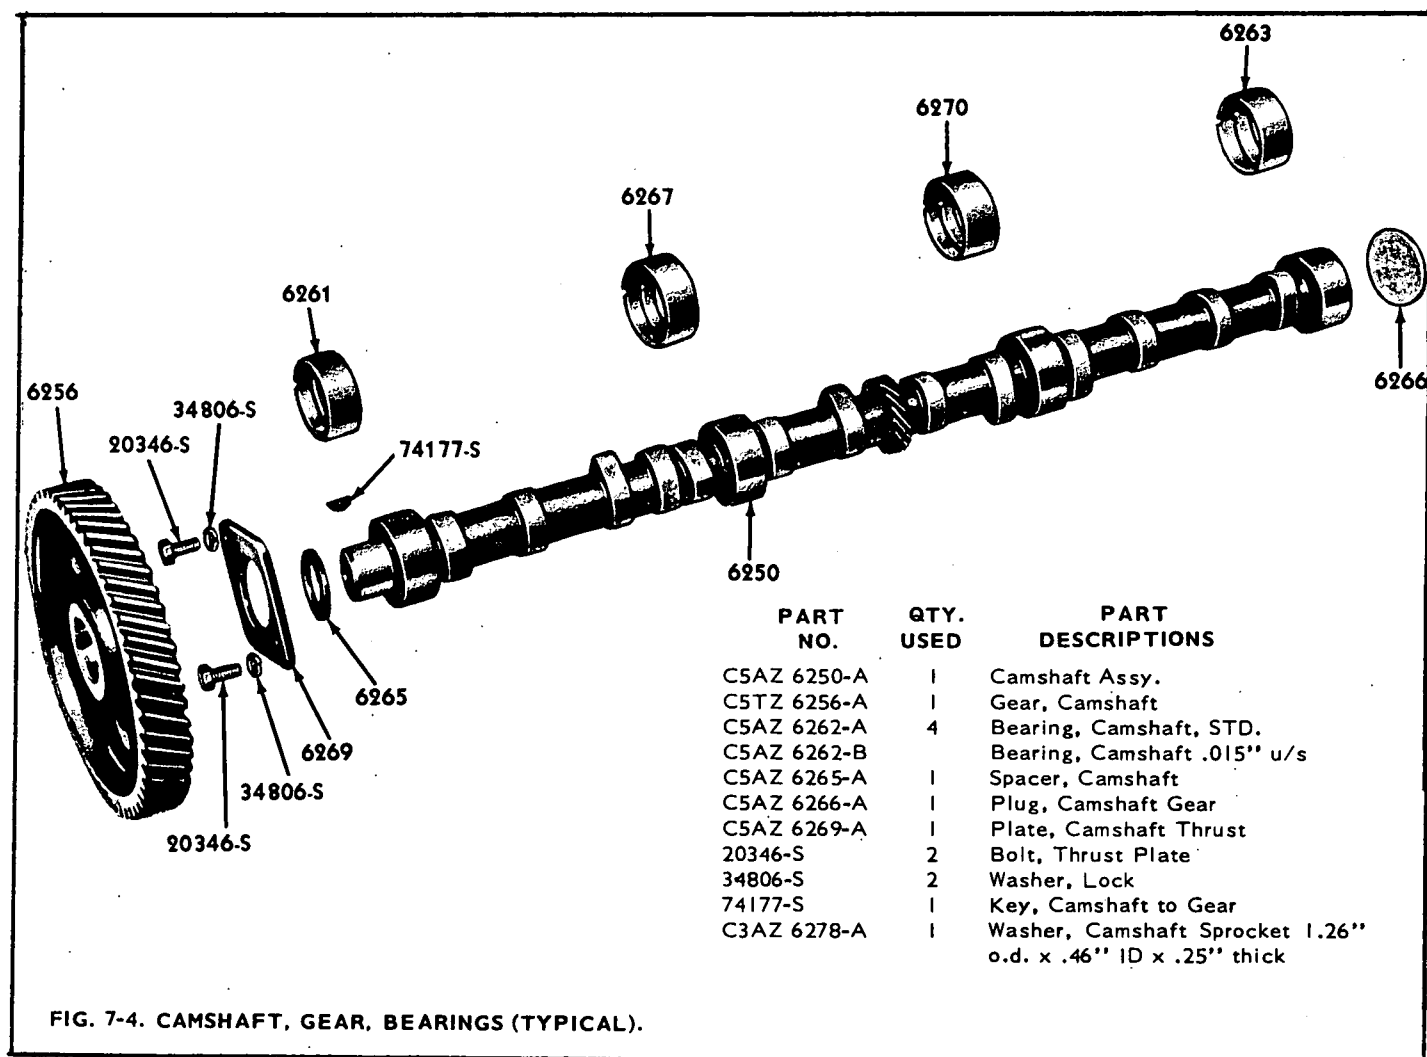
CAMSHAFT, GEAR, BEARINGS (TYPICAL).
